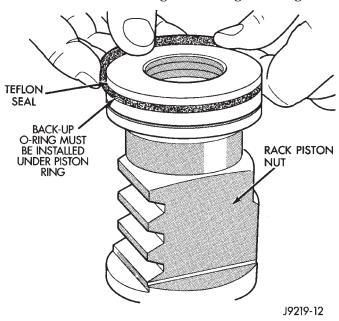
Rack Piston Teflon Ring and O-Ring INSTALLATION
